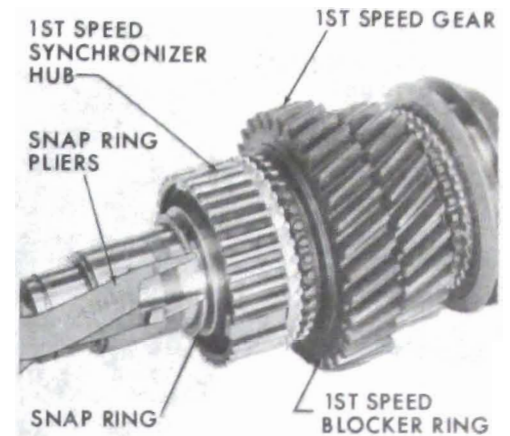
Installing First-Speed Synchronizer Snap Ring
